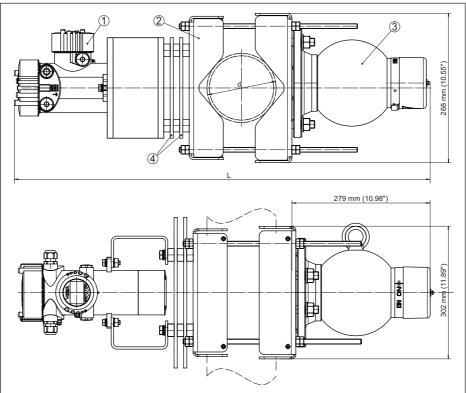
Mounting bracket with horizontally mounted sensor and heat protection kit (with VEGASOURCE 31, 35)
